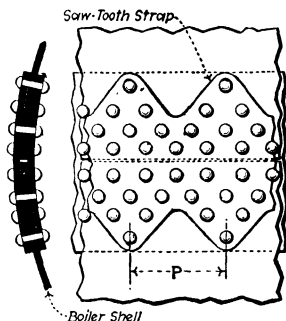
Butt joint, quadruple-riveted, saw tooth type.
